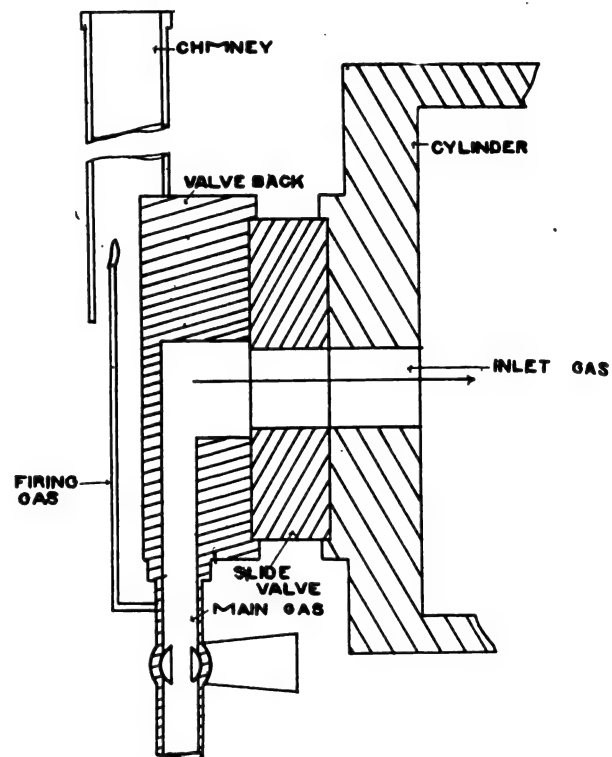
Another Form of Early Gas Engine Slide Valve.
